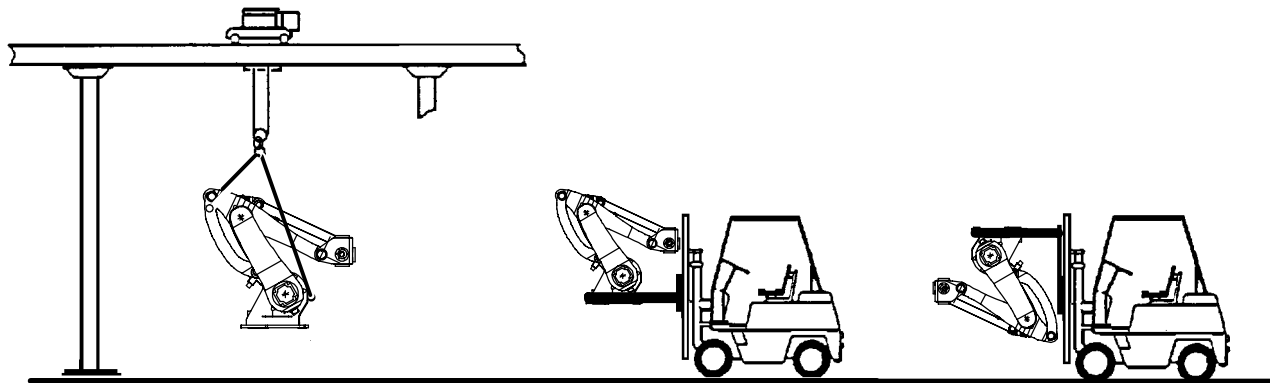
Transporting floor-mounted and ceiling-mounted manipulators
